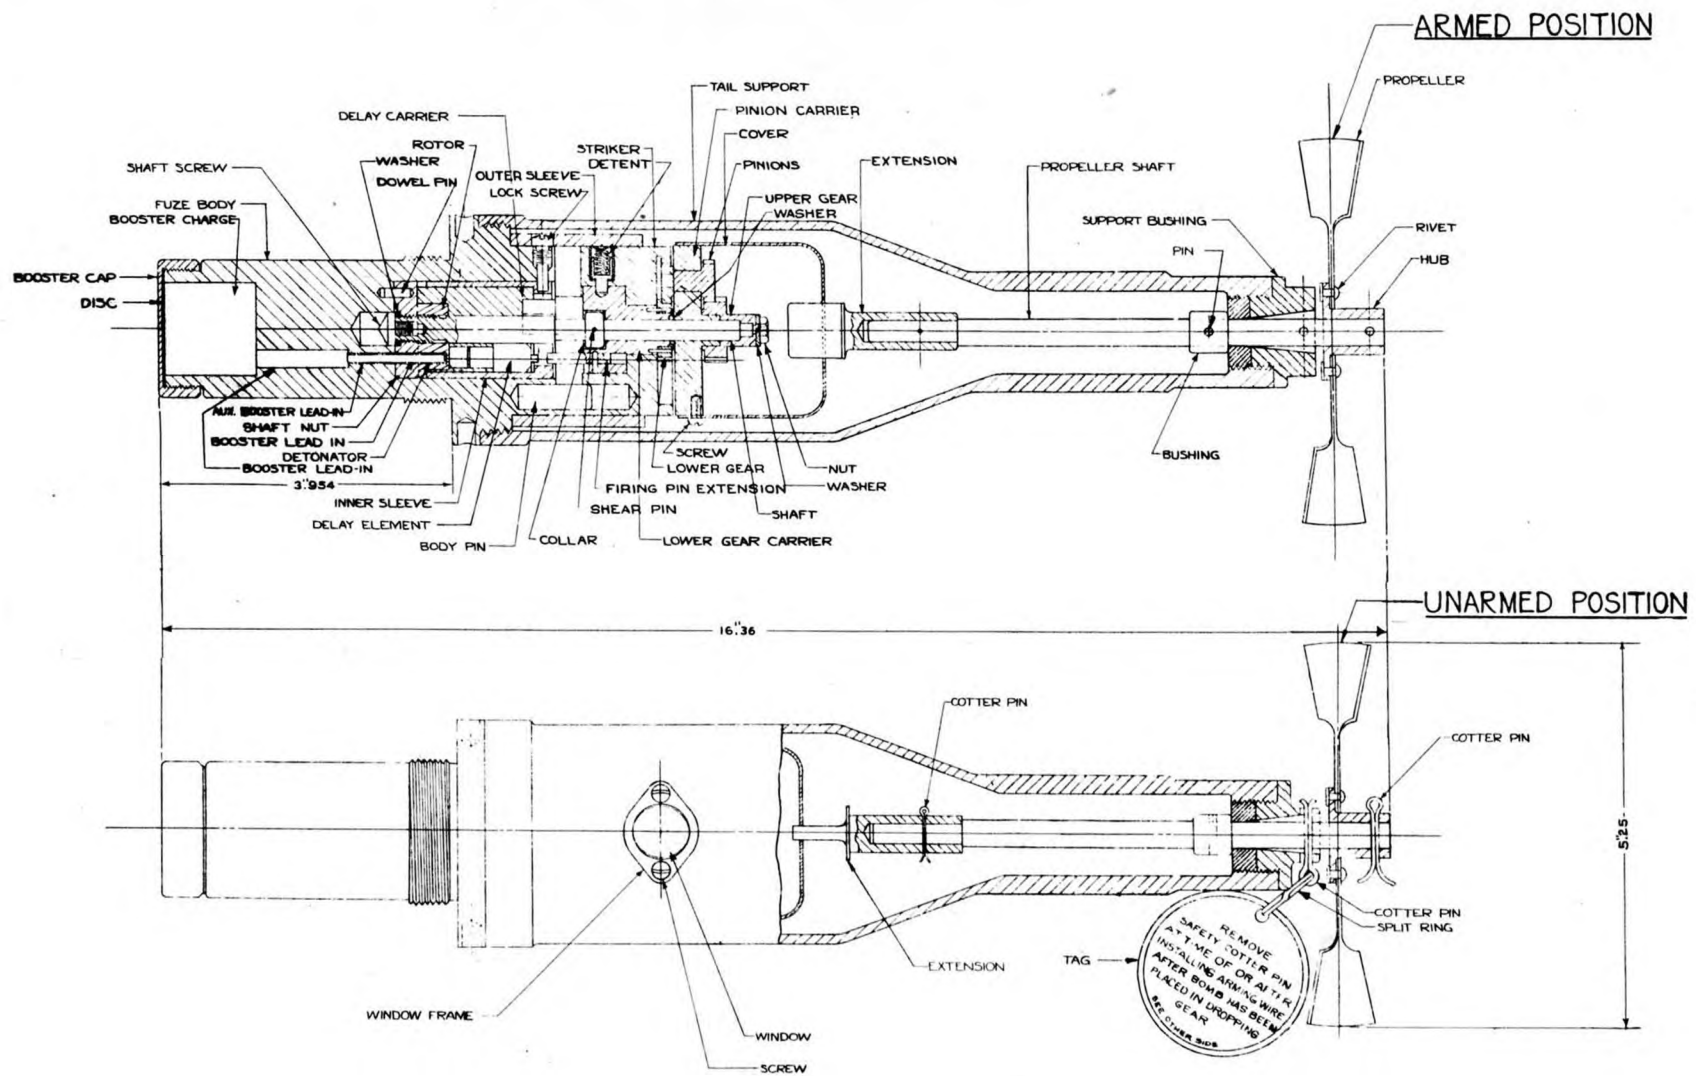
FUZE, BOMB, TAIL — MARK 223. GENERAL ARRANGEMENT DRAWING.
